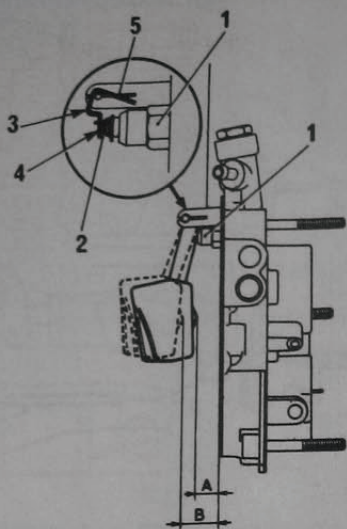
Float level adjustment - Weber carburettor (Sec 17)
